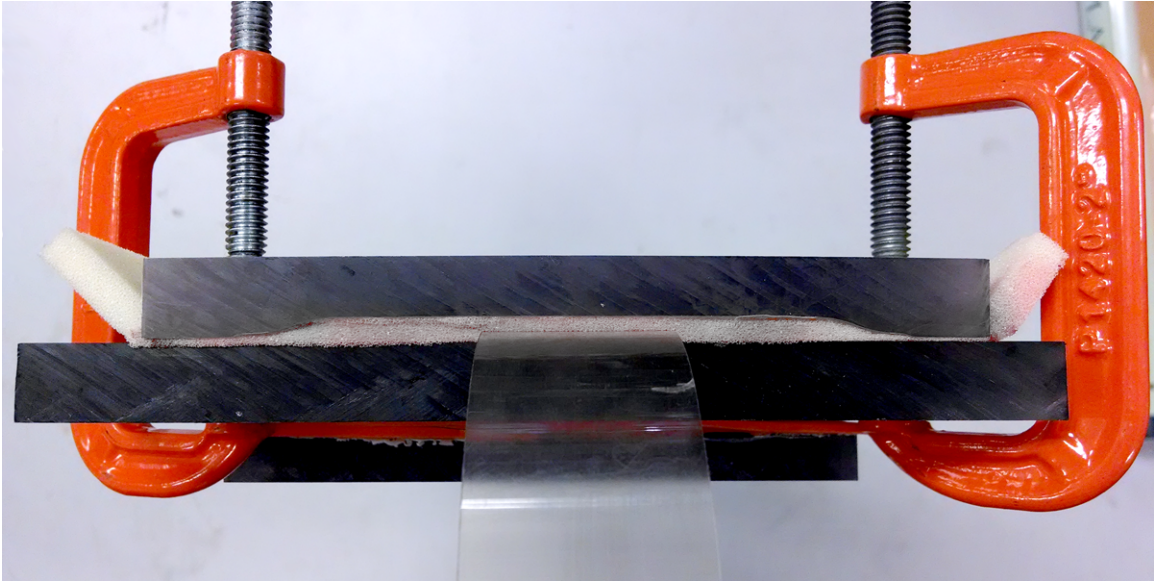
End view of the assembly. Note that the seal material (white) is highly compressed at the edges; this blocks transverse flow, i.e. seals the edges effectively.
